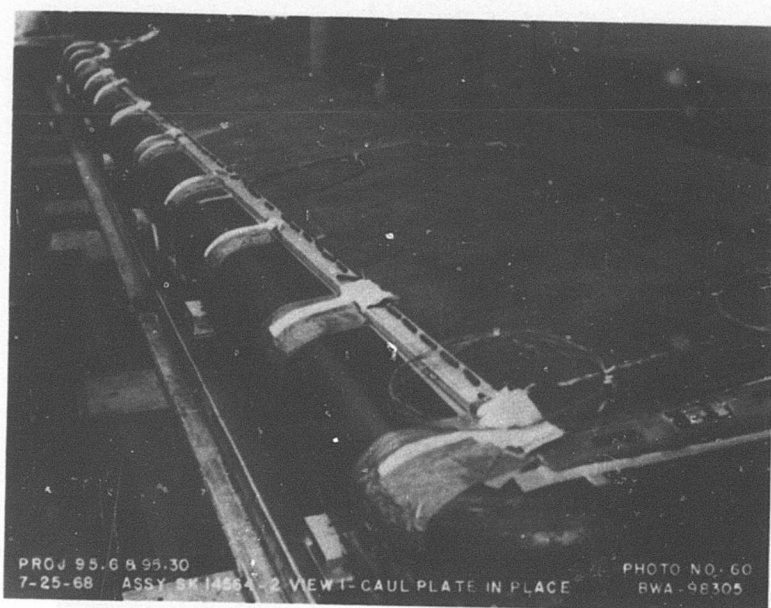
Tip-End View of Blade in Final Assembly With Caul Plate in Place.
